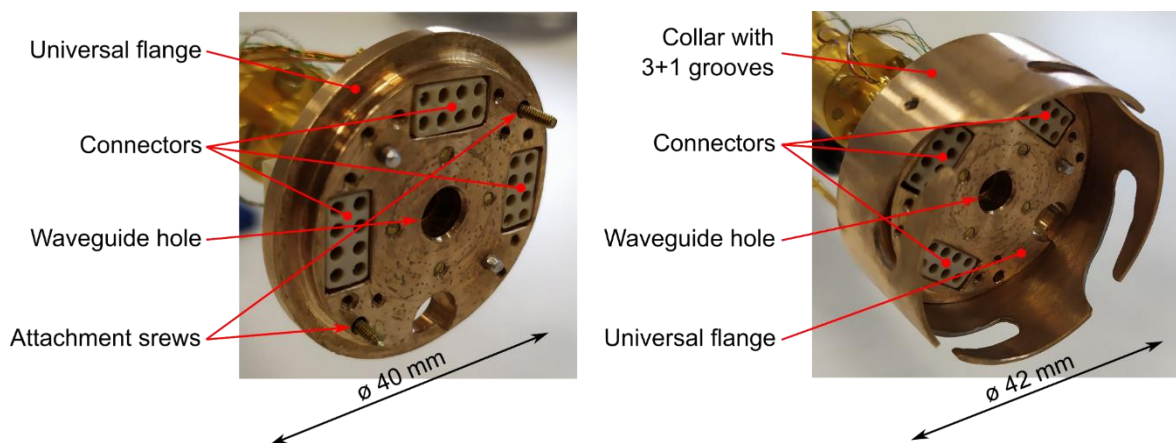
Universal flange (left) with attachment with screws and bayonet mechanism (right), prototypes were produced in the workshop in CEITEC BUT.
